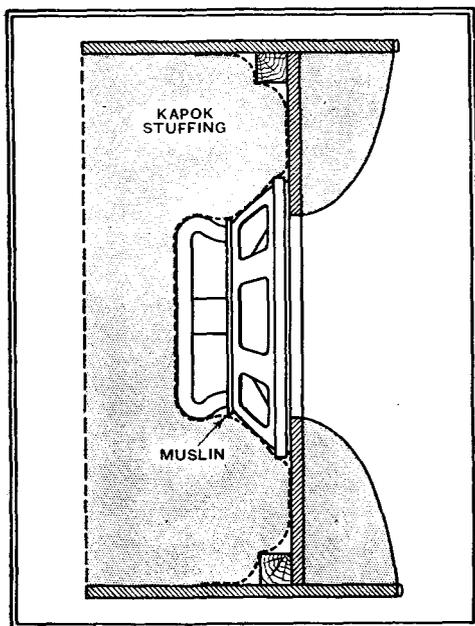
Section through the cabinet, showing recessed baffle board and absorbent packing.
